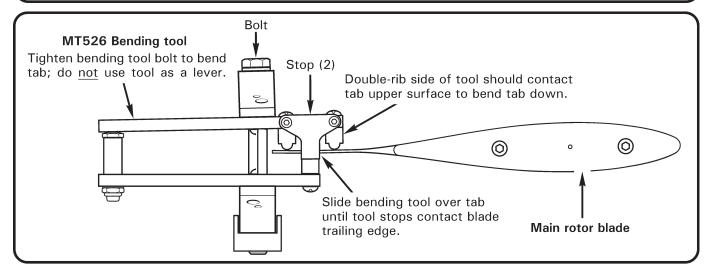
MAIN ROTOR BLADE TRIM TAB ADJUSTMENT
